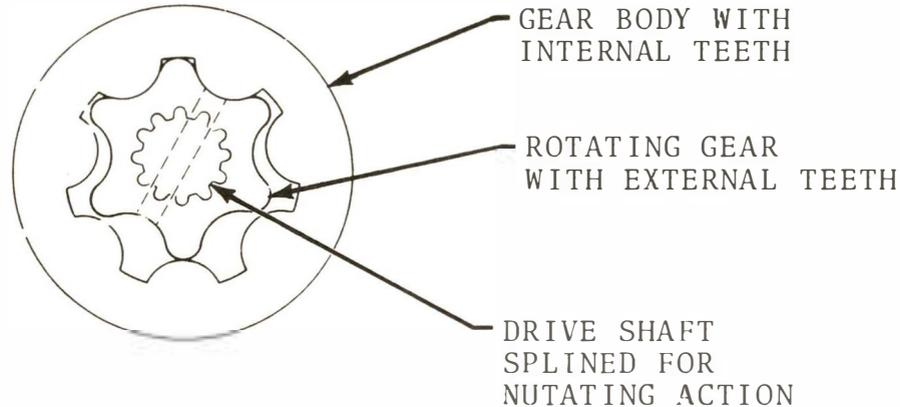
Section Through Hand Metering Pump/Valve Gear Assembly
